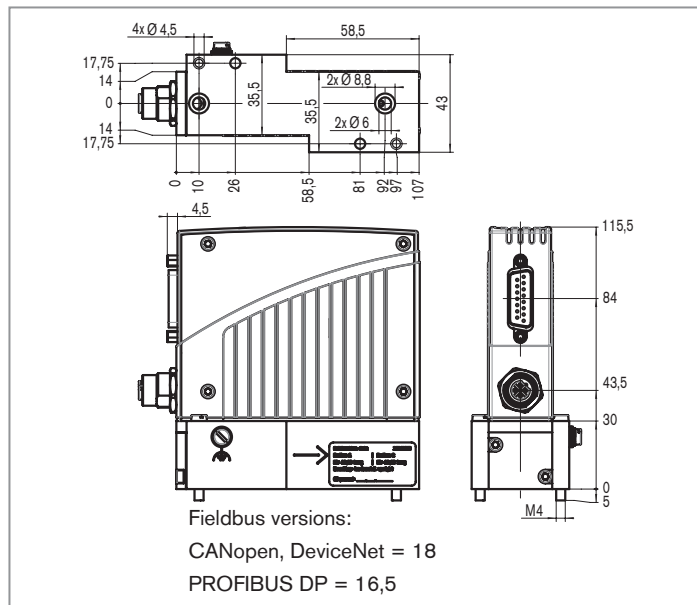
Dimensions of MFM with flanges, types 8700 and 8701, and MFC with flanges, types 8710 and 8711
